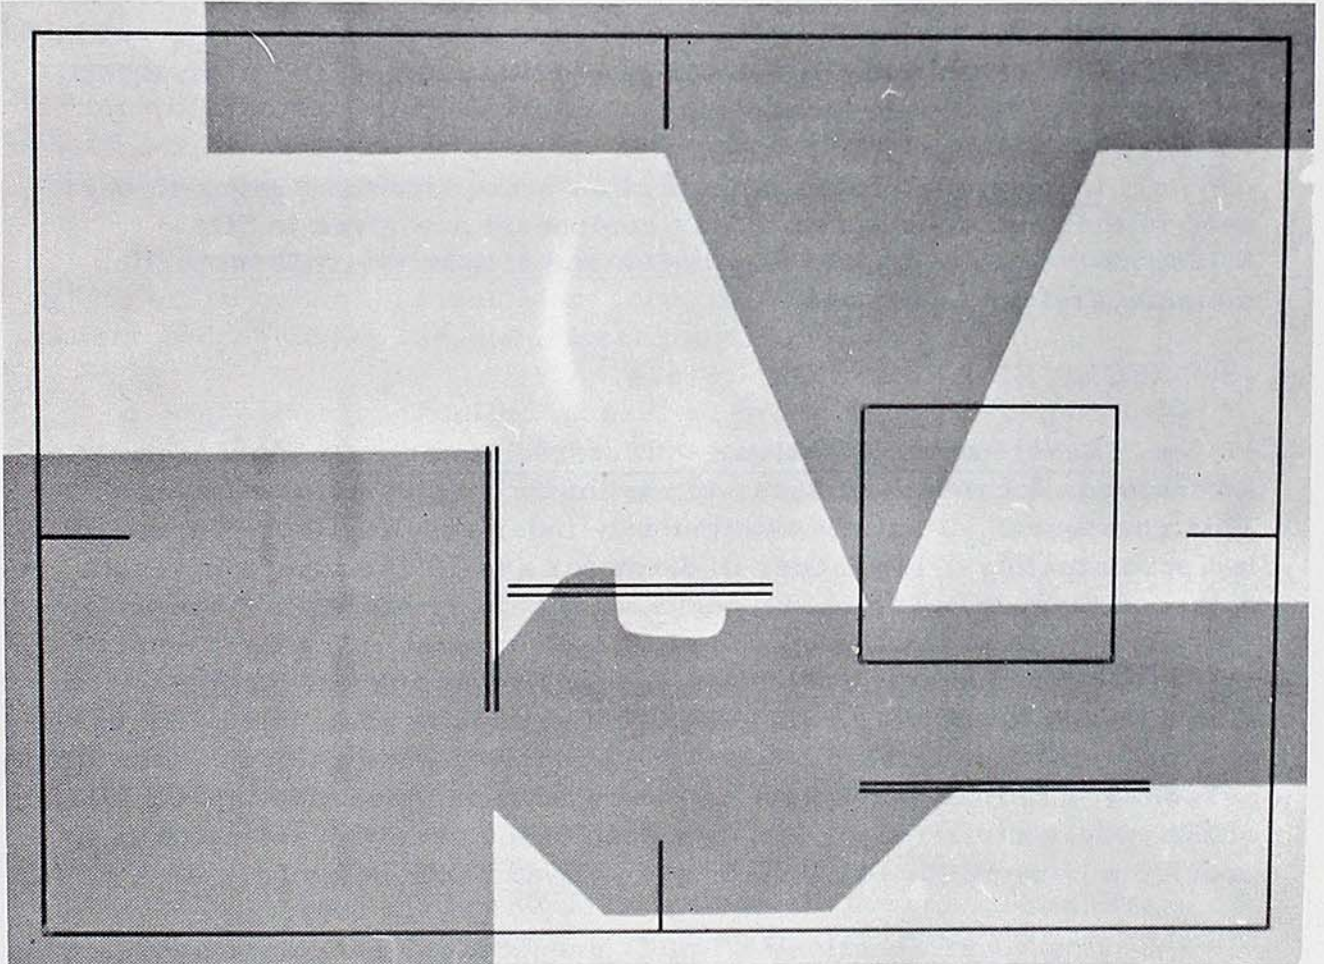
Component Setting for Checking Location of Pivot Hole from Cartridge Slot End of Extractor.
